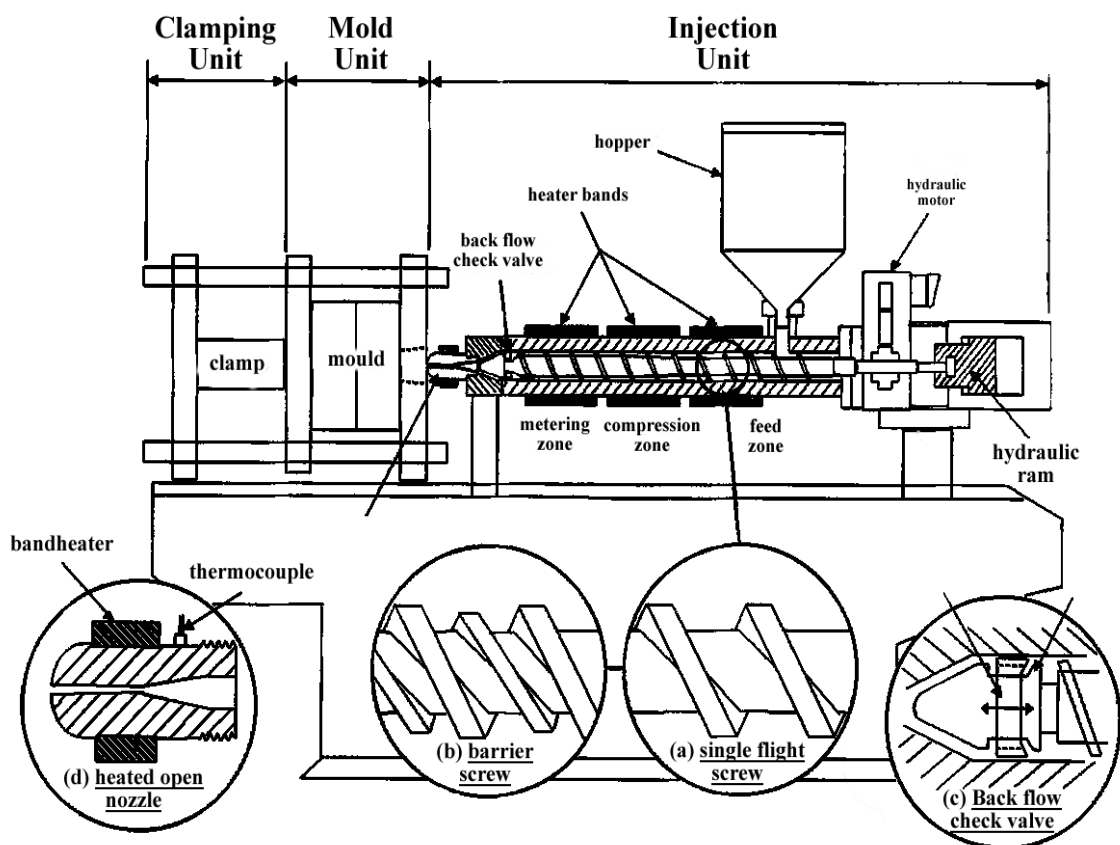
Schematic diagram of screw injection moulding machine [73]
